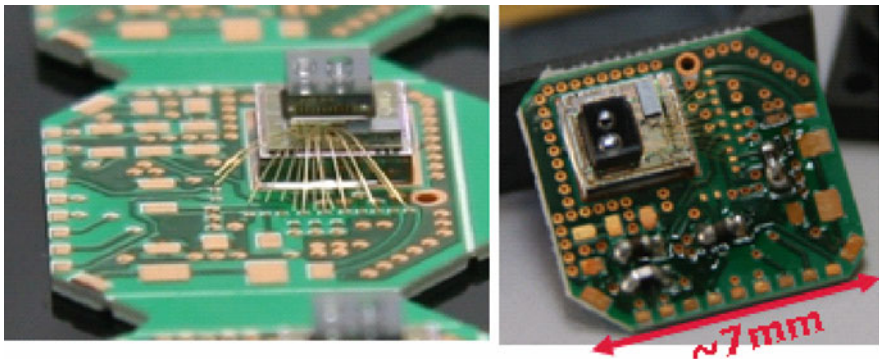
TPMS 3D chip sub-stack assembled on the micro-PCB
